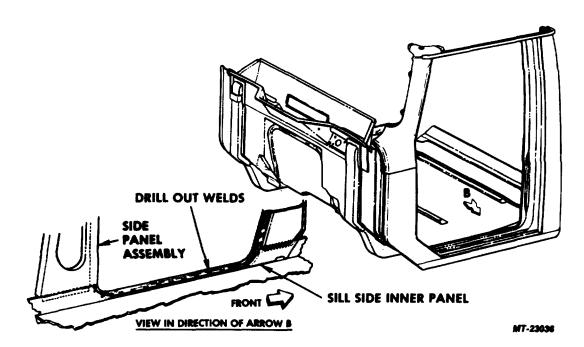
Side Panel To Sill Side Inner Panel Spot Welds
